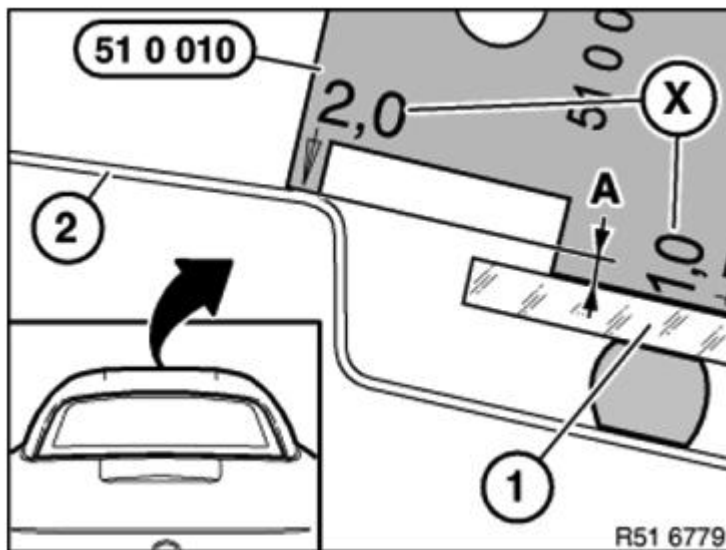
Checking Pre-Tension On Rear Window Using Special Tool 51 0 010
